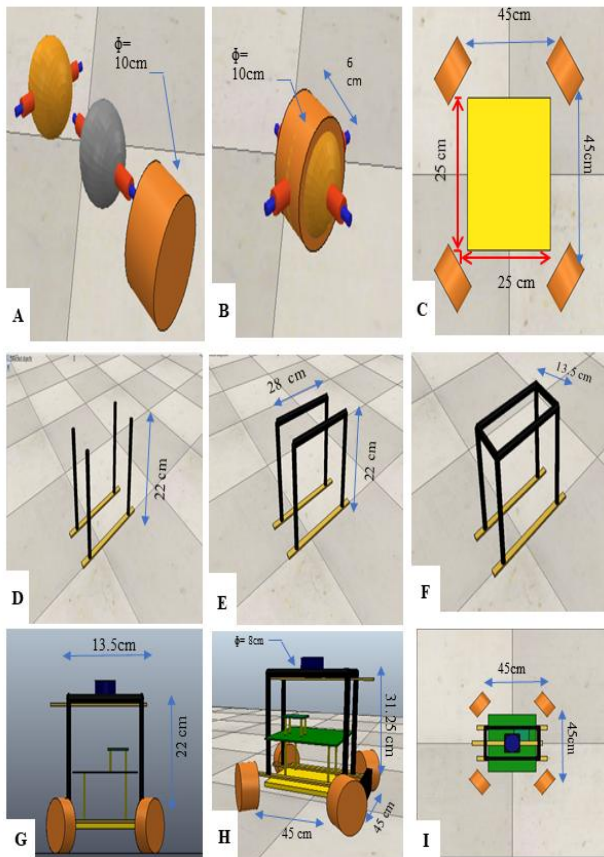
Build an OMNI robot platform. (A&B) wheel disassembled (C) Chaises (D,E,F) Robot Chassis holder. (G) robot Side view. (H) robot Right view (I) robot Top view.
